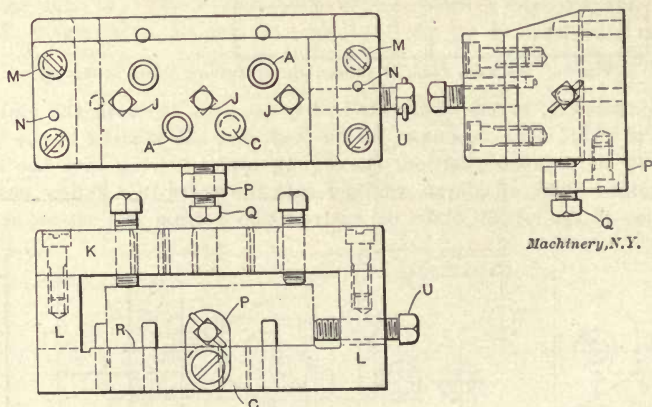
Further Improvements in Jig, suiting it to Manufacturing Purposes
